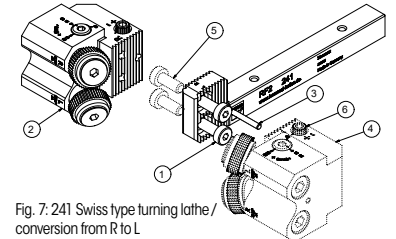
241 Swiss type turning lathe / conversion from R to L
